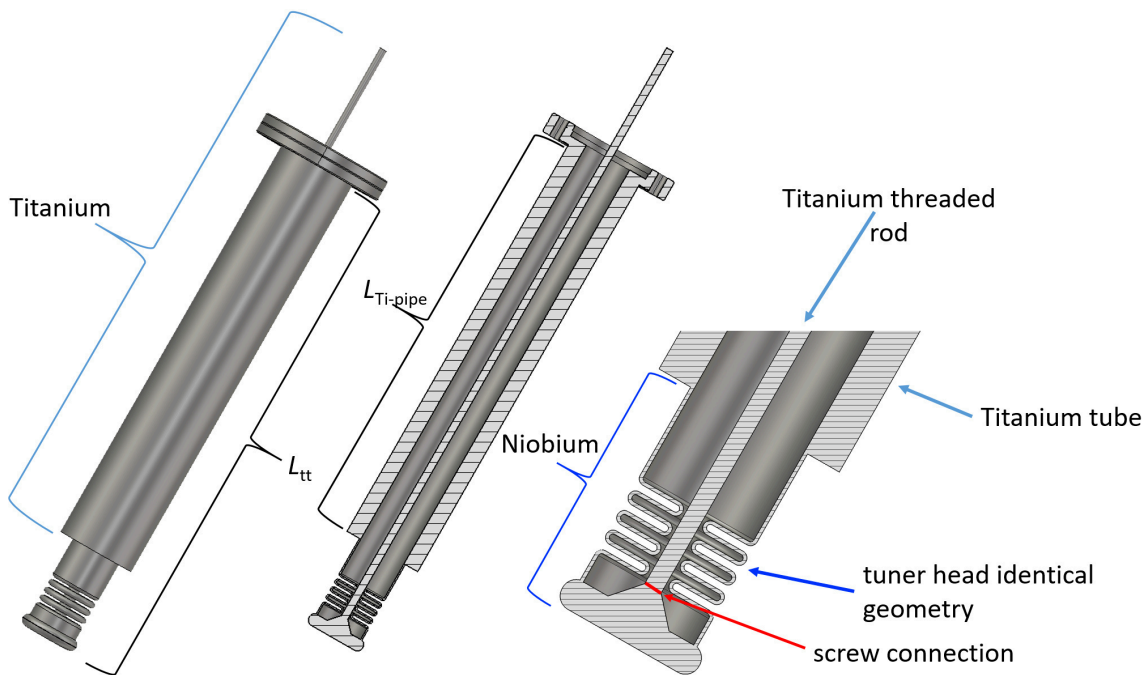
Schematic of the dynamic bellow test tuner adapted for the tuner test bench complete, as a cross-section and as a close-up of the head in cross-section.
